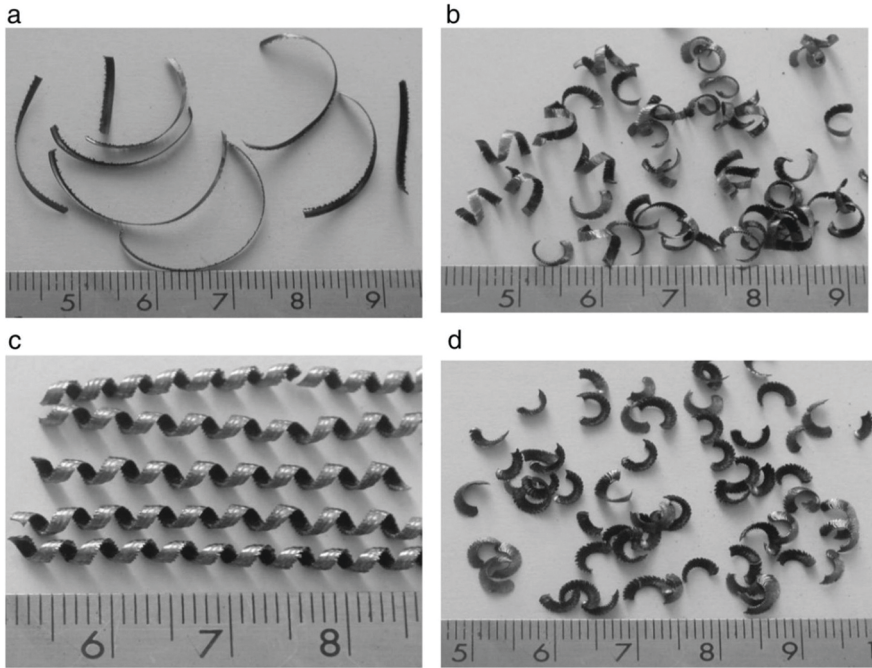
Aspects of chips obtained as a function of cutting conditions (30× magnification) (a) under cutting conditions $v = 140$ m/min, $f = 0.18$ mm/rev and $d = 0.8$ mm, (b) under cutting conditions $v = 260$ m/min, $f = 0.18$ mm/rev and $d = 0.8$ mm, (c) under cutting conditions $v = 200$ m/min, $f = 0.18$ mm/rev and $d = 1.2$ mm and (d) under cutting conditions $v = 260$ m/min, $f = 0.18$ mm/rev and $d = 1.2$ mm. (From Ref. [15].)
